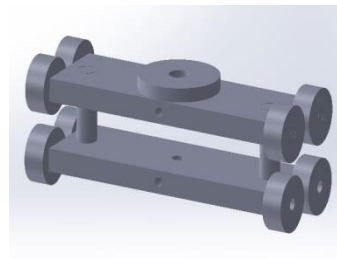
Magnet Carts for Attaching the Strips to the Wall
